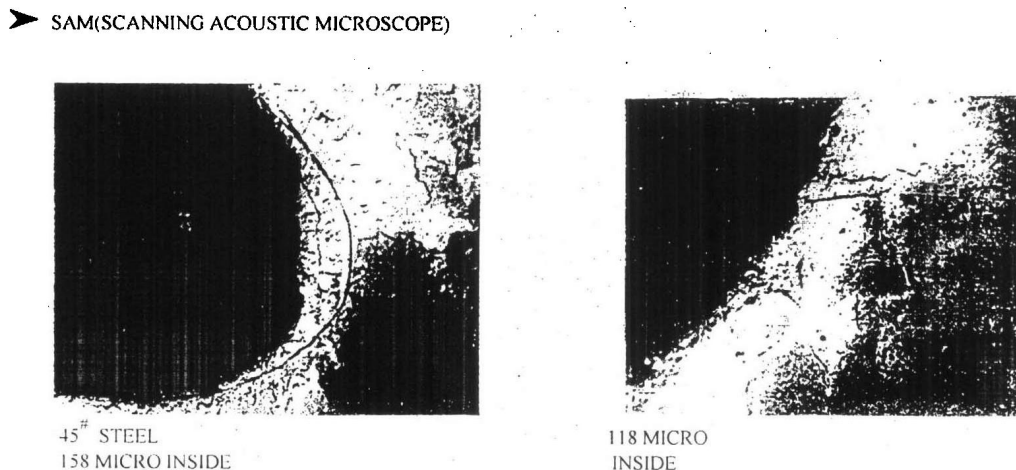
Circular cracks (left) and radio cracks (right) in steel by SAM
